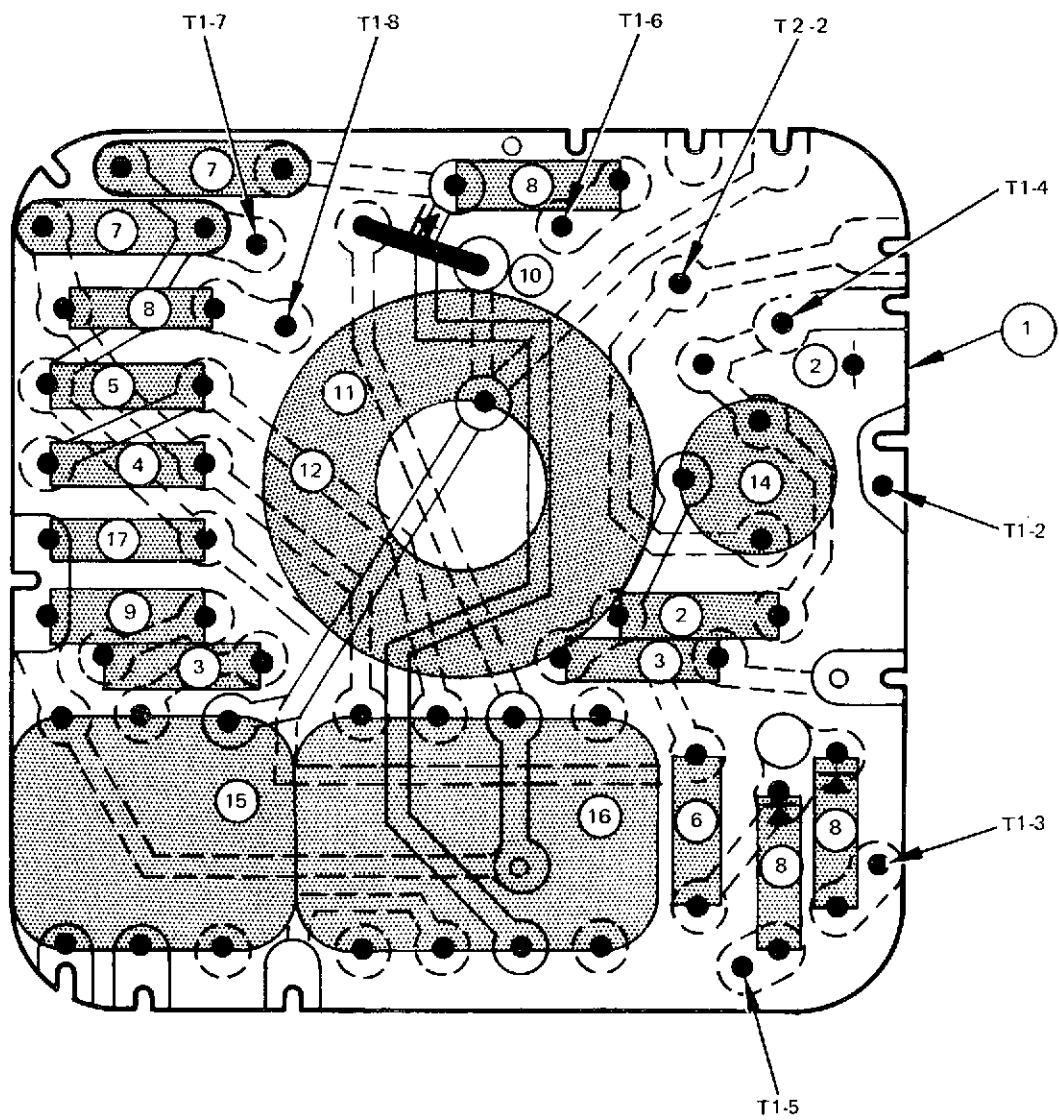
CIRCUIT BOARD ASSEMBLY – BOTTOM, DC CONTROLLERS
